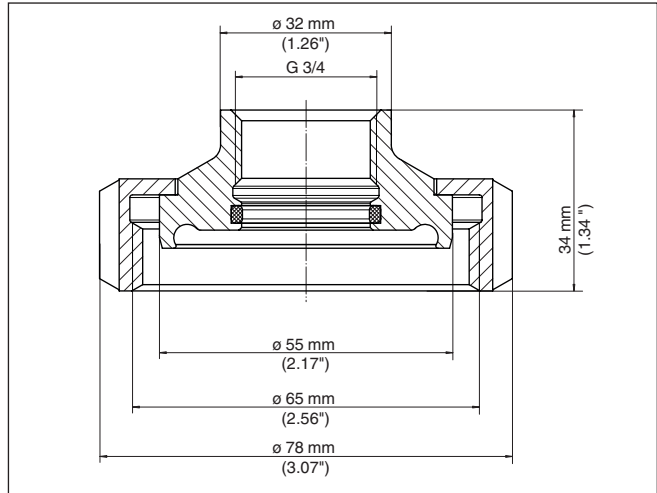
Dimensions of threaded adapter G $\frac{3}{4}$  (DIN 3852-X) on slotted nut DN 40 (DIN 11864-1) PN 16
